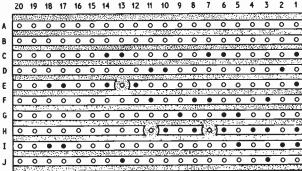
Underside view of the board. Copper strip breaks are shown. Soldered connections are shown with the holes blacked in
